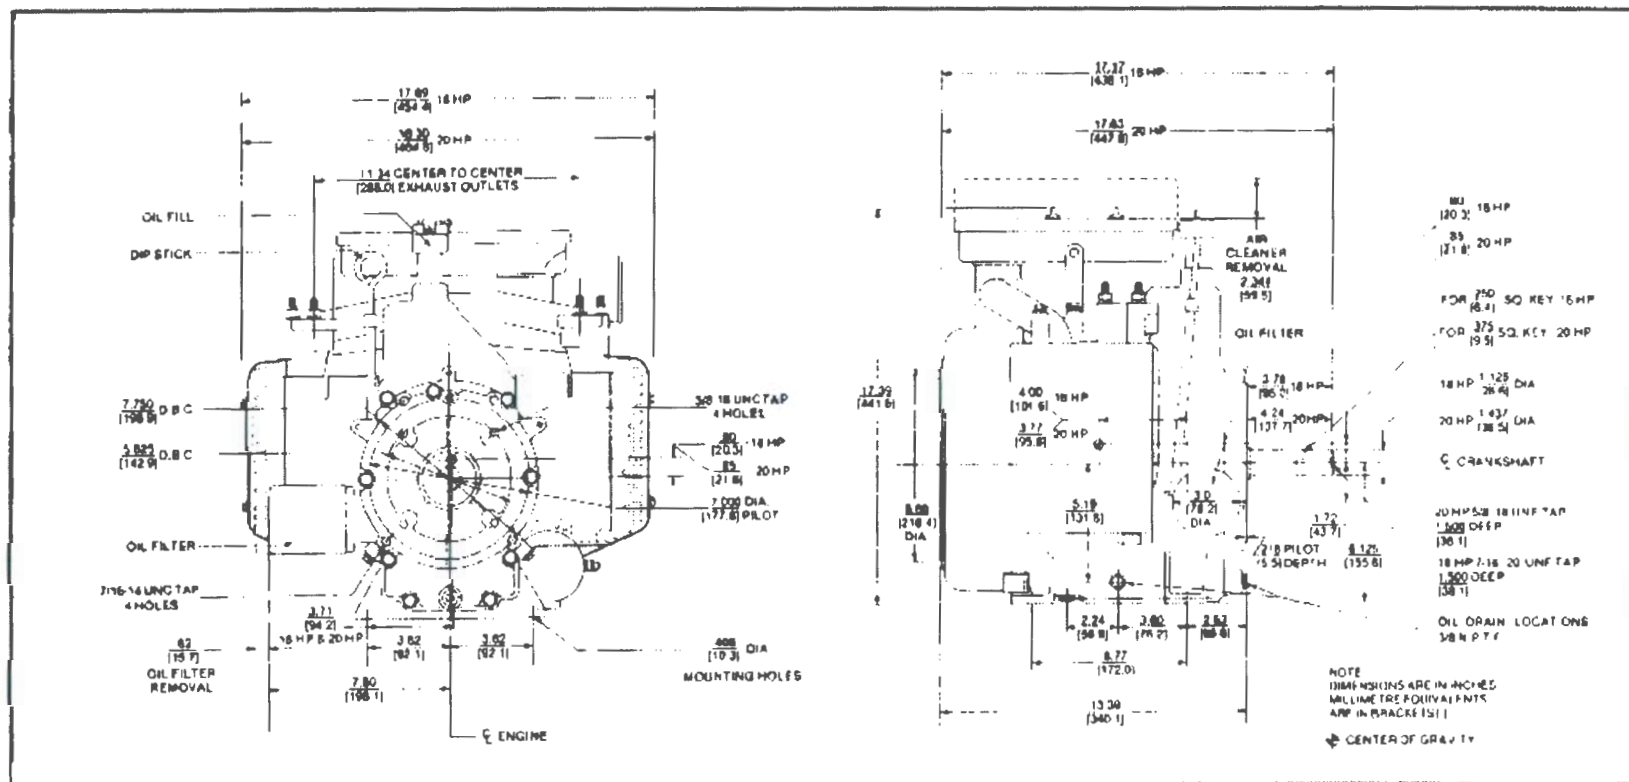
The available drawing of Kohler Magnum 18 external dimensions is shown (Kohler, 2004).
